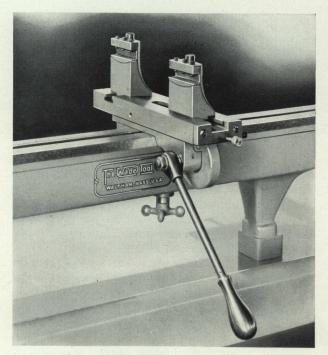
The Double Cross Slide with Rocker Tool Holders
